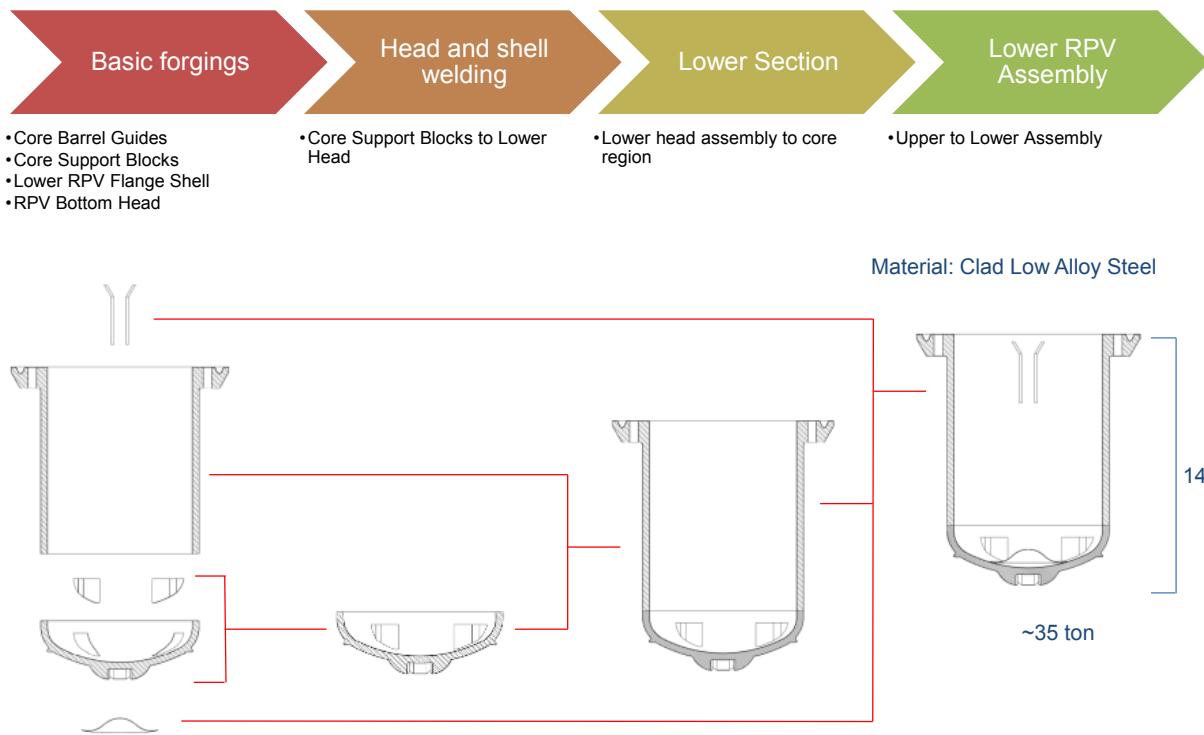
Lower Reactor Pressure Vessel Assembly
